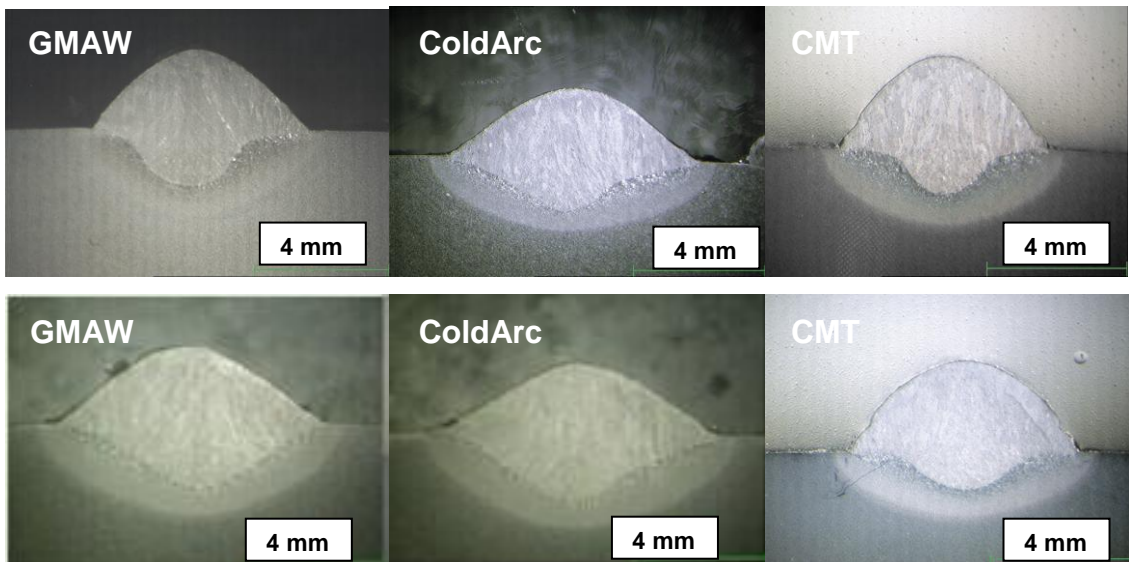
Macrographs showing the welds with (top) 5 m/min WFS and (bottom) 6 m/min WFS
